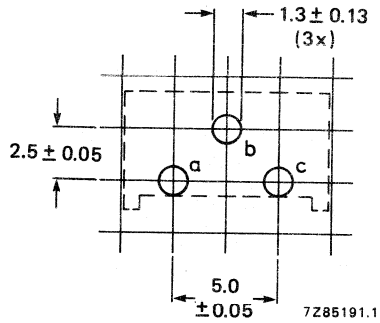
Hole pattern for vertical versions, viewed from component side.
